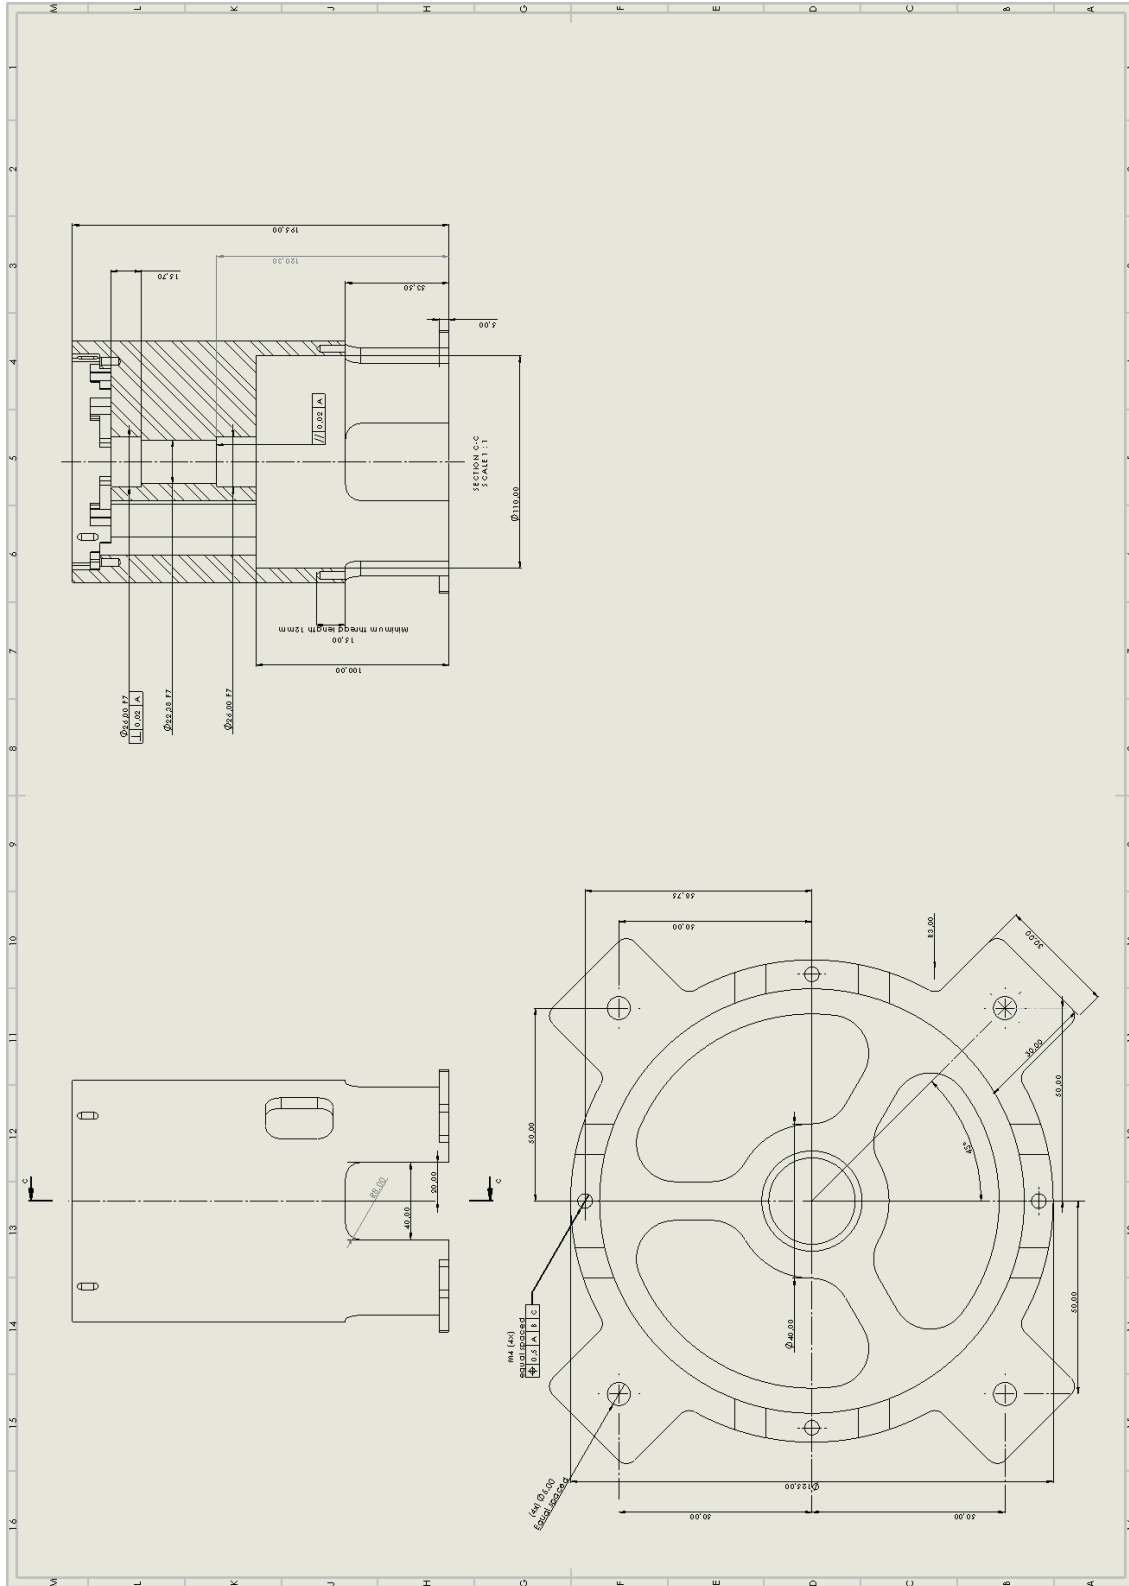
Housing measures and tolerances, sheet 3, 2D
